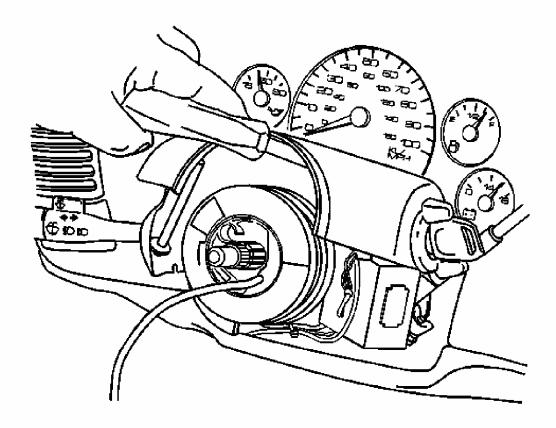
View of Lock Cylinder Access Hole Courtesy of GENERAL MOTORS CORP.
